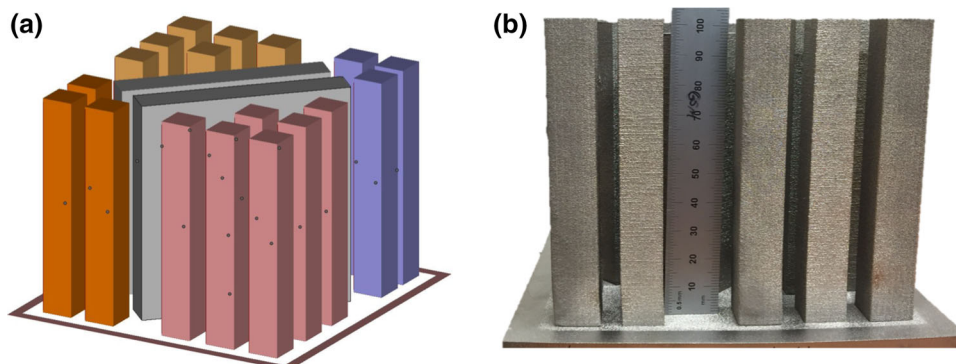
Build layout used for the fabrication of mechanical test specimen blanks in this study: (a) CAD model, (b) front view of completed EBM build.
